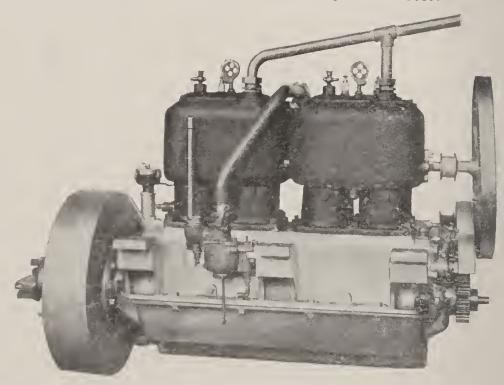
Opposite side of same Motor showing Carburetor and Inlet Pipe.
